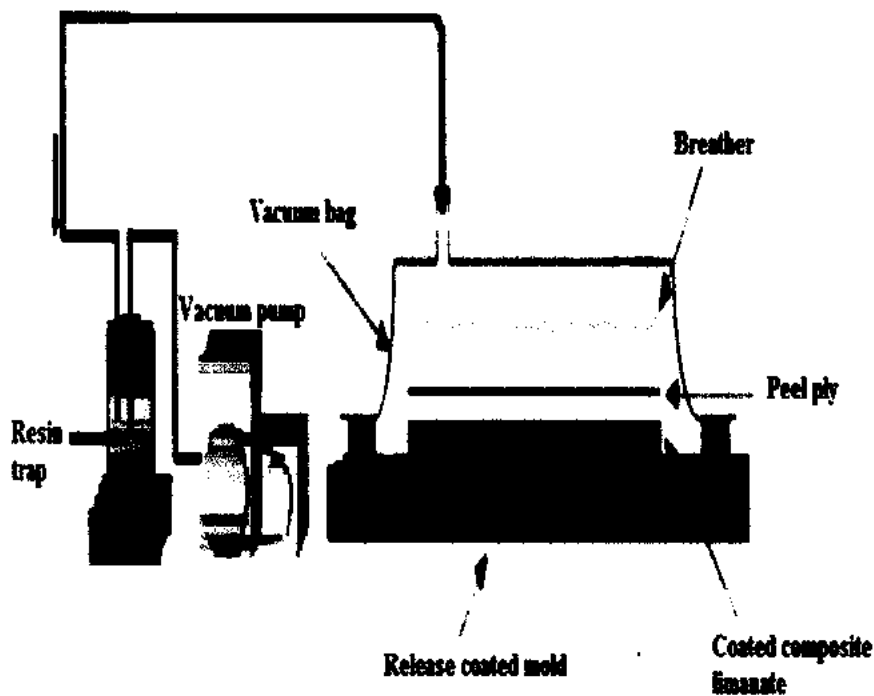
Composite sample cured by vacuum bagging technique [5].
